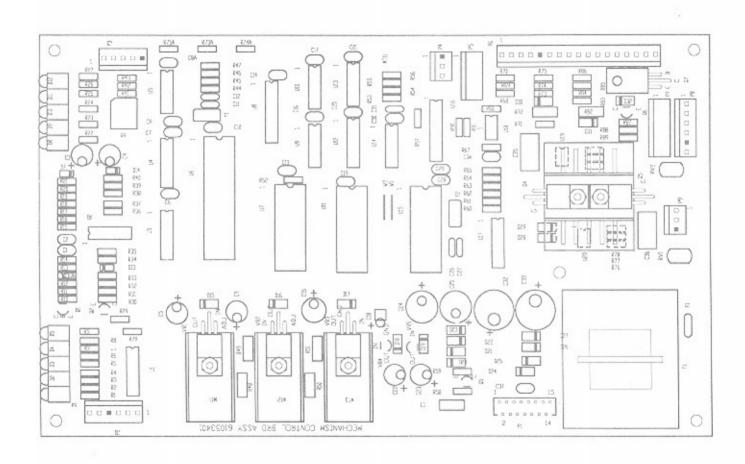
C. Mechanism Control Assembly Circuit Board Layout 61053401-C
